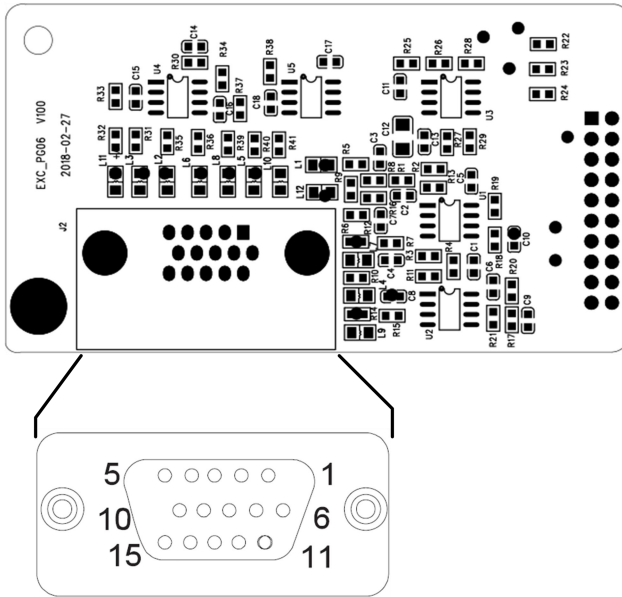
EXC-PG06 Sin-Cos encoder PG card
